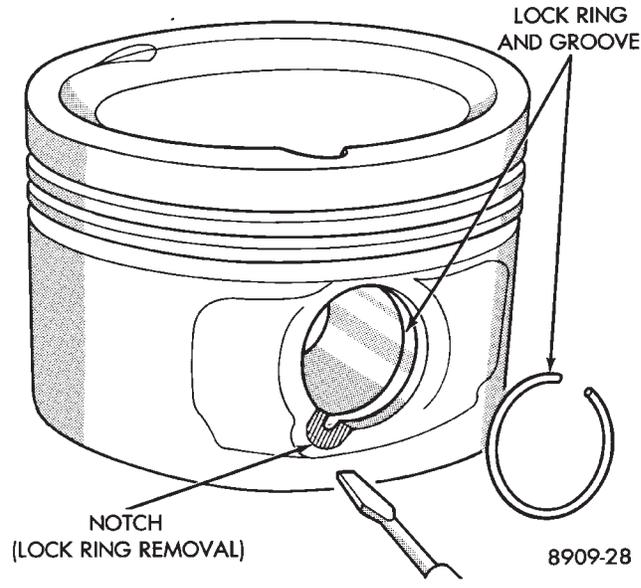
Piston Pin Lock Ring Removal Notch-Turbocharged Engine
